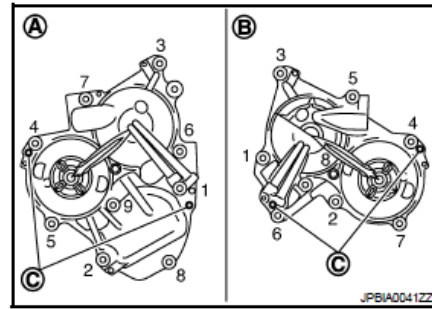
Identifying Mounting Bolts Tightening Sequence
